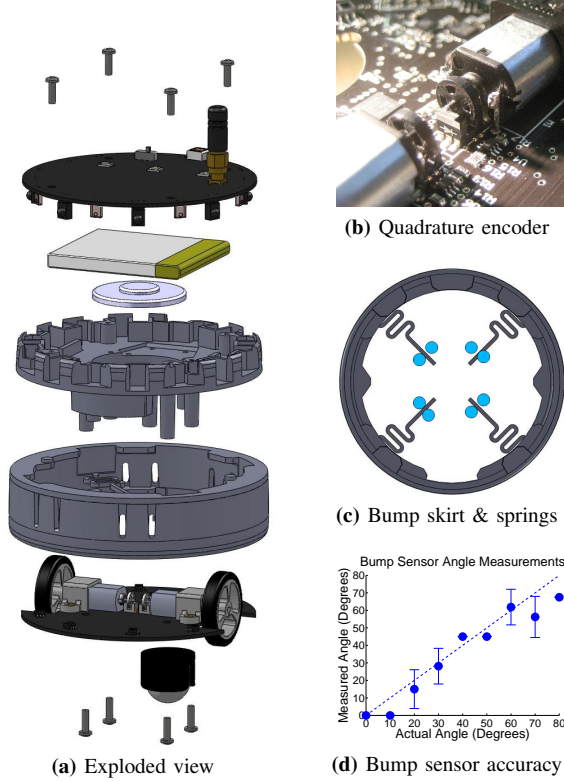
(a) Exploded CAD view of the robot assembly. The robot is composed of two circuit boards and a plastic chassis. (b) The motors and encoders mount directly to the circuit board. Each quadrature encoder costs \$0.75 and has a resolution of 0.0625 mm/tick. (c) Top view of the bump skirt. The light blue circles are posts from the chassis. The flexure springs are molded into the skirt and have a serpentine path to reduce their effective spring constant. (d) Bump sensor experiment data. We tested angles from 0° to 90° over 12 trials. The sensor has an average error of 8.1°.
